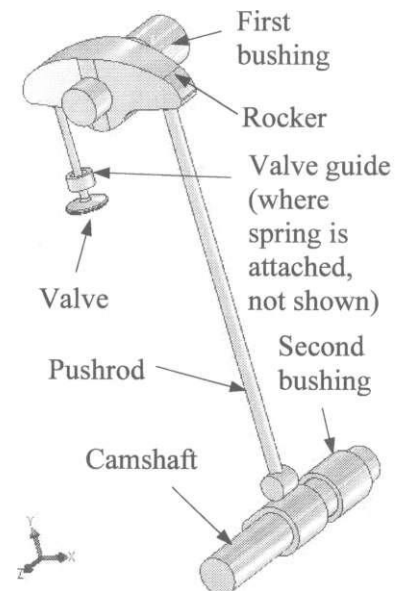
The Mechanism of Engine Inlet or Outlet Valve
